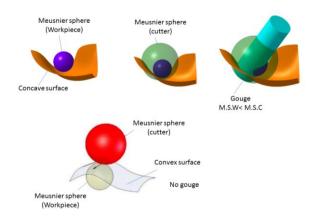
Machined surfaces and cutter Meusnier sphere.
